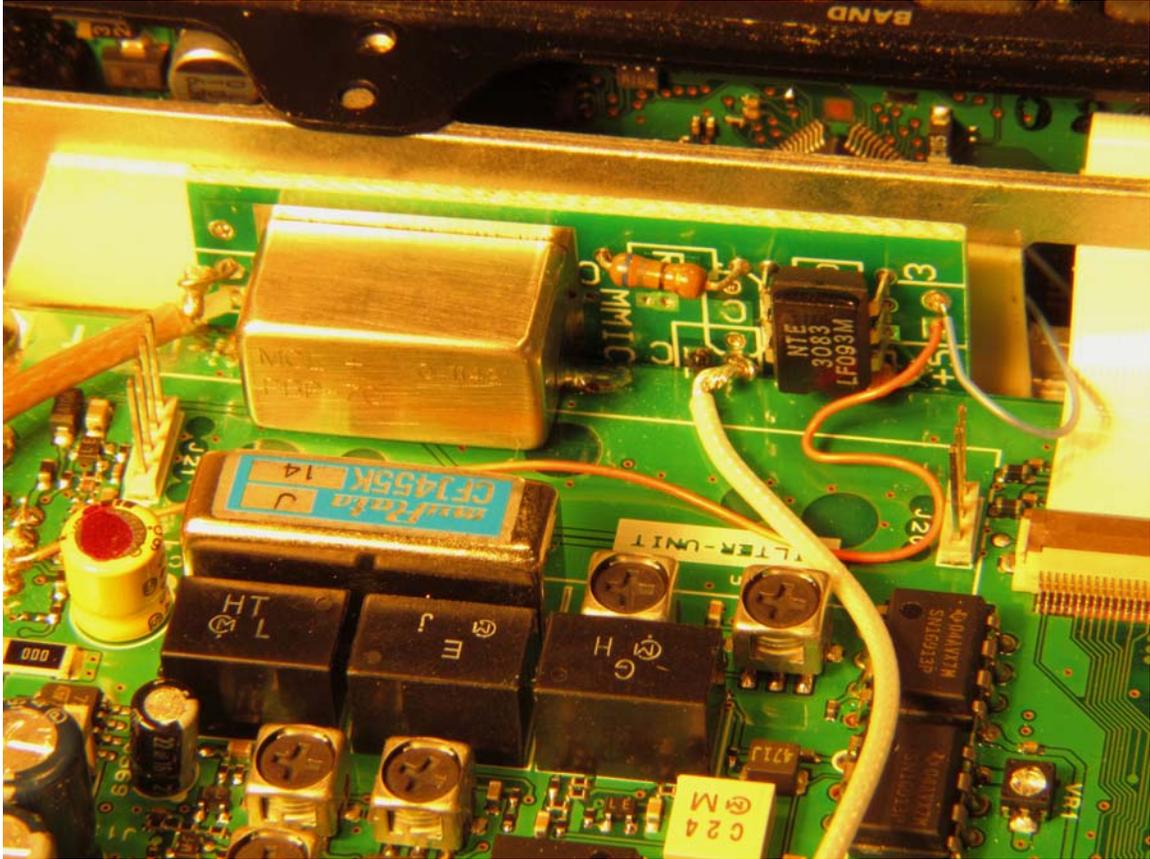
Panadapter board installed in FT-817 (no CW filter)
